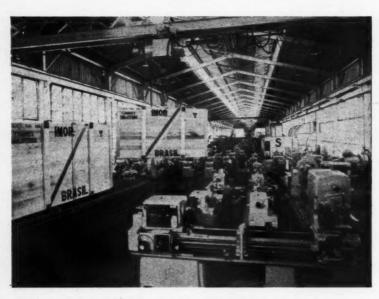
General view of the assembly shop at the Romi plant. Sub-assemblies are built in the section at the far end, and are passed to the main lathe assembly lines at the right
